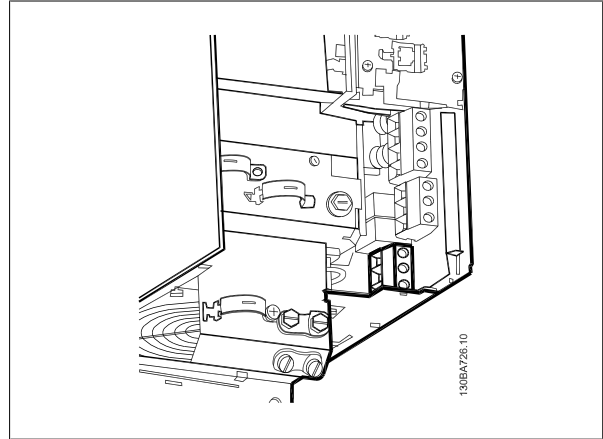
Motor connection for for unit size 23 IP20 Open Chassis drive type (230V, 7.5 to 10HP, 460V/575V, 15 to 25HP).
